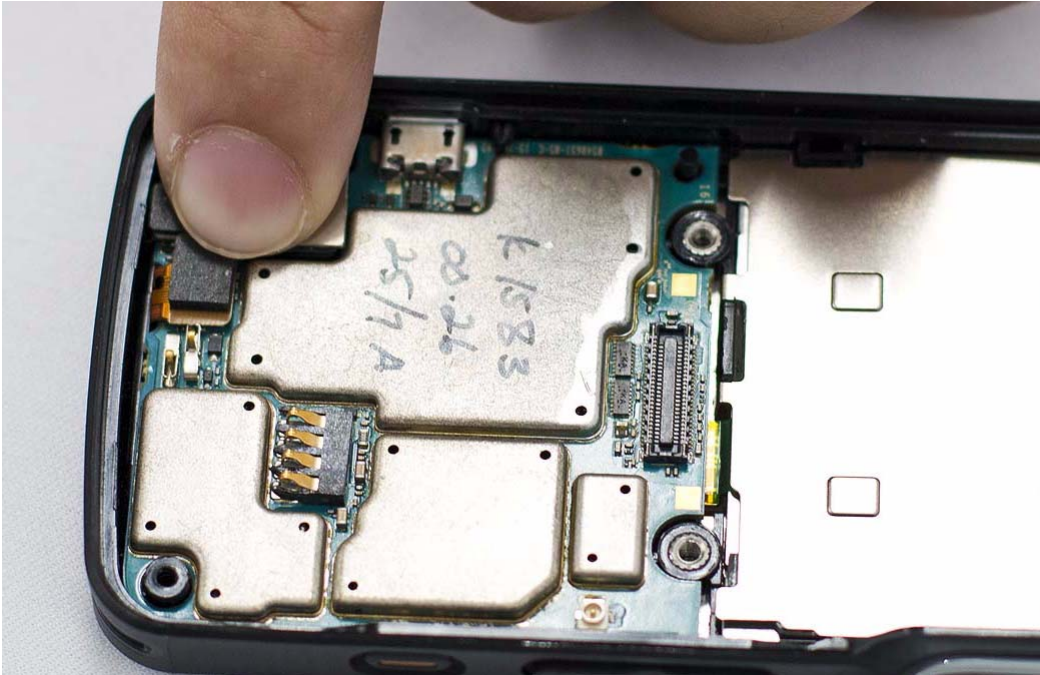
Audio jack flex connector and keypad connector re-assembly
